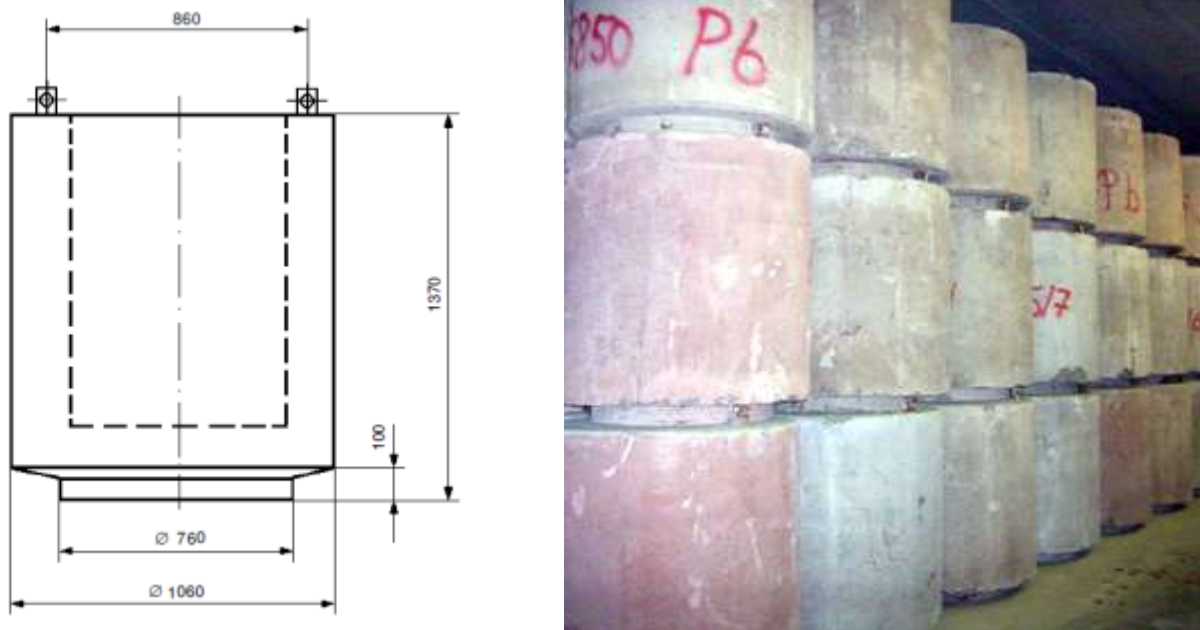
Technical specification and photograph of Konrad Type 1/2 single-drum shielding container (the dimensions in the drawing are in millimeters)
